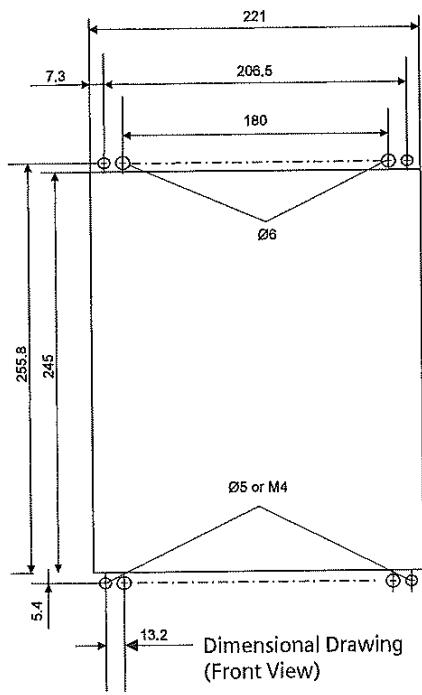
Dimensional drawing of a SIPROTEC 7SJ66 (housing size 1/2)
